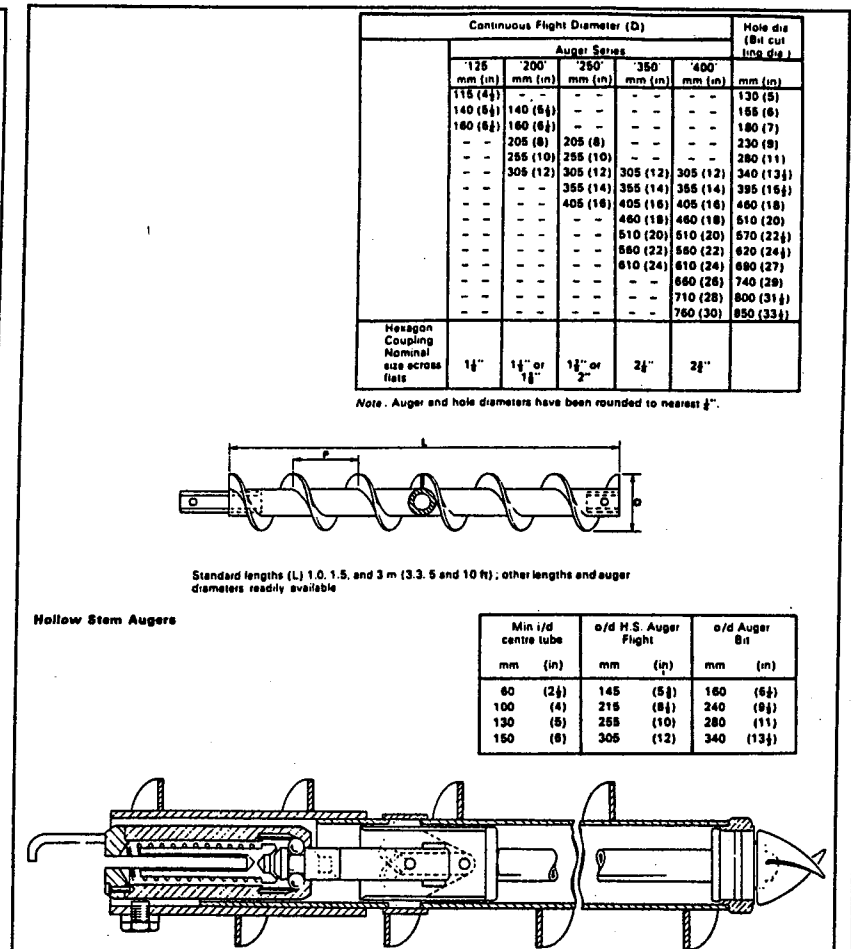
Standard sizes of continuous flight, and hollow stem augers (Hands England).
